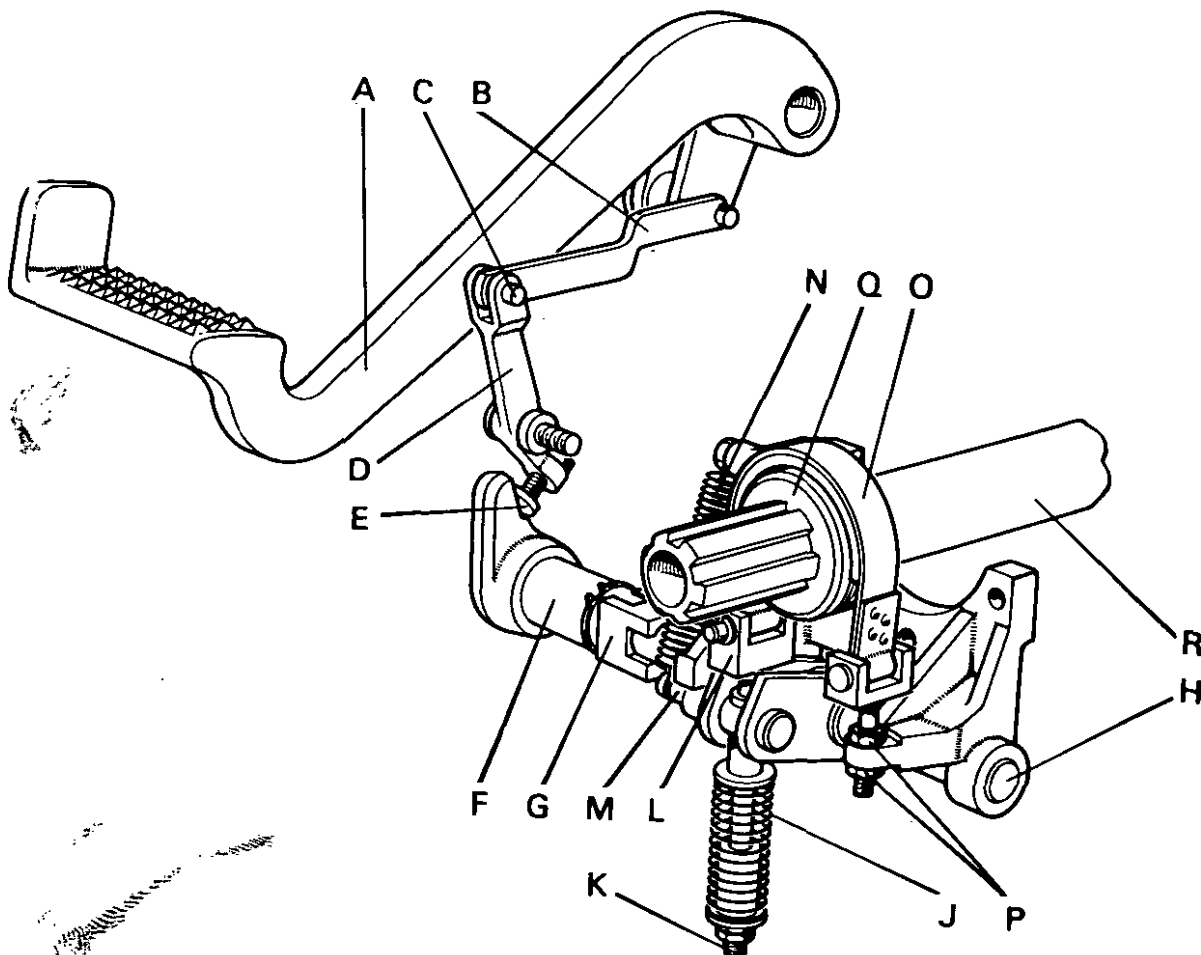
CLUTCH STOP — 990/880/780 LIVEDRIVE TRACTORS
